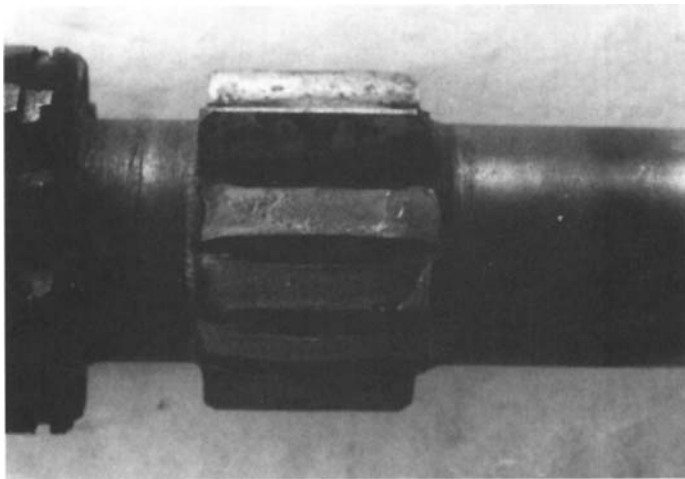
Gear shaft for reducing gear box with a quench crack after induction hardening. (Courtesy of Kayaba Industry Co., Tokyo, Japan.)
